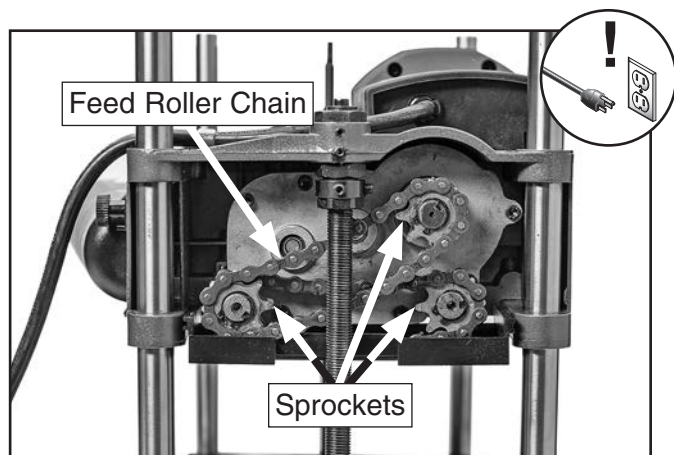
Cutterhead elevation leadscrews and feed roller drive chain exposed for lubricating.
